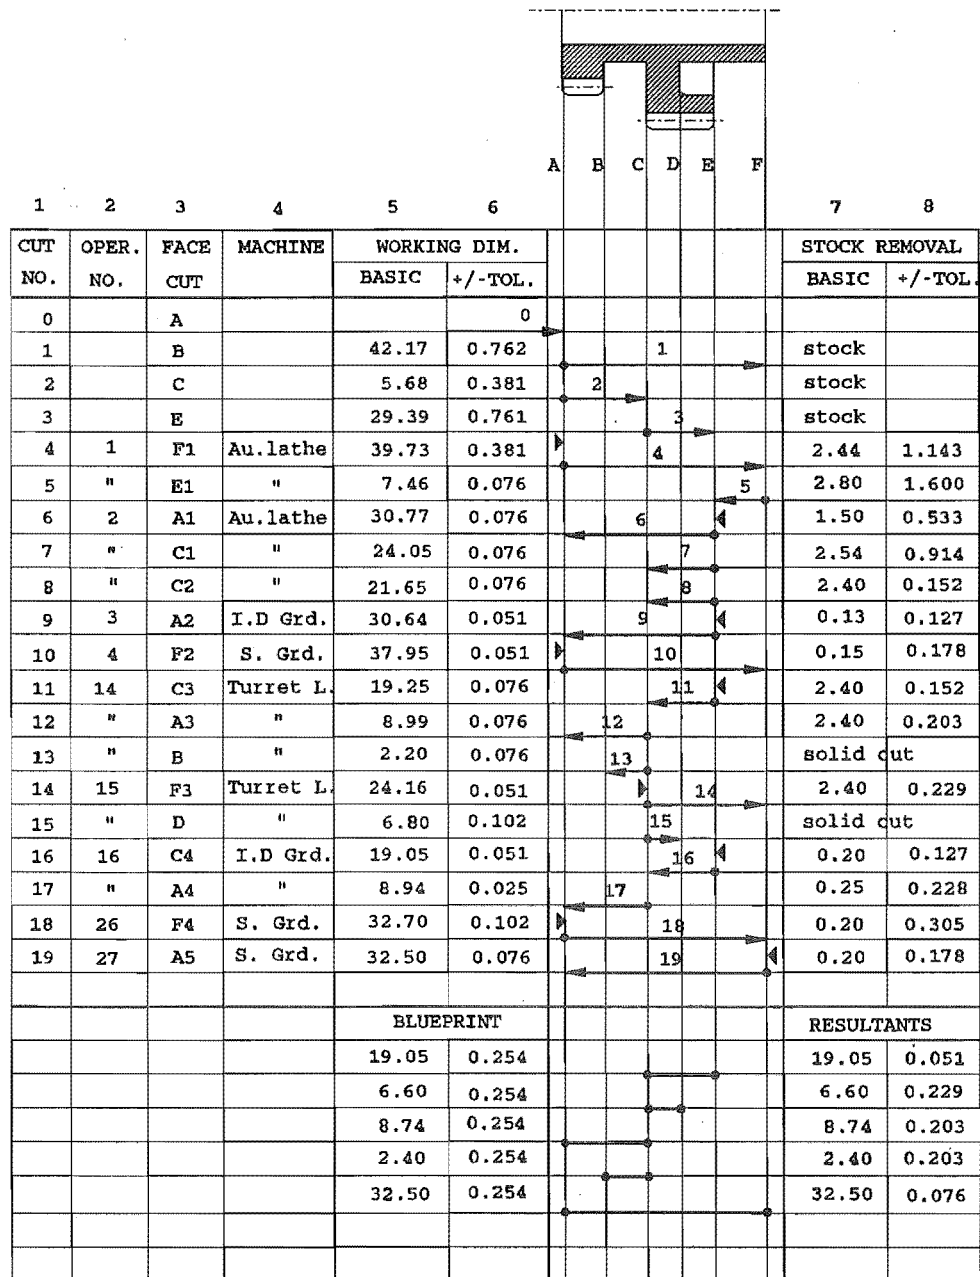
Tolerance chart for producing a gear [66].
